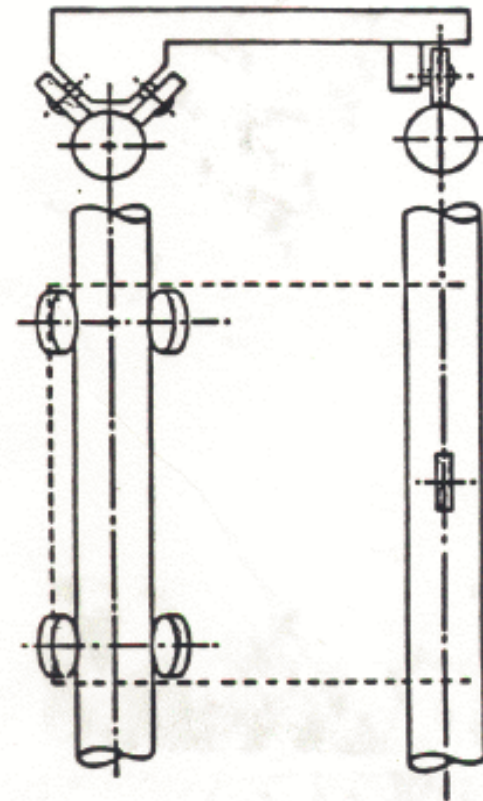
Kinematic design employing cylindrical surfaces as guides. Such surfaces can be accurately made.
